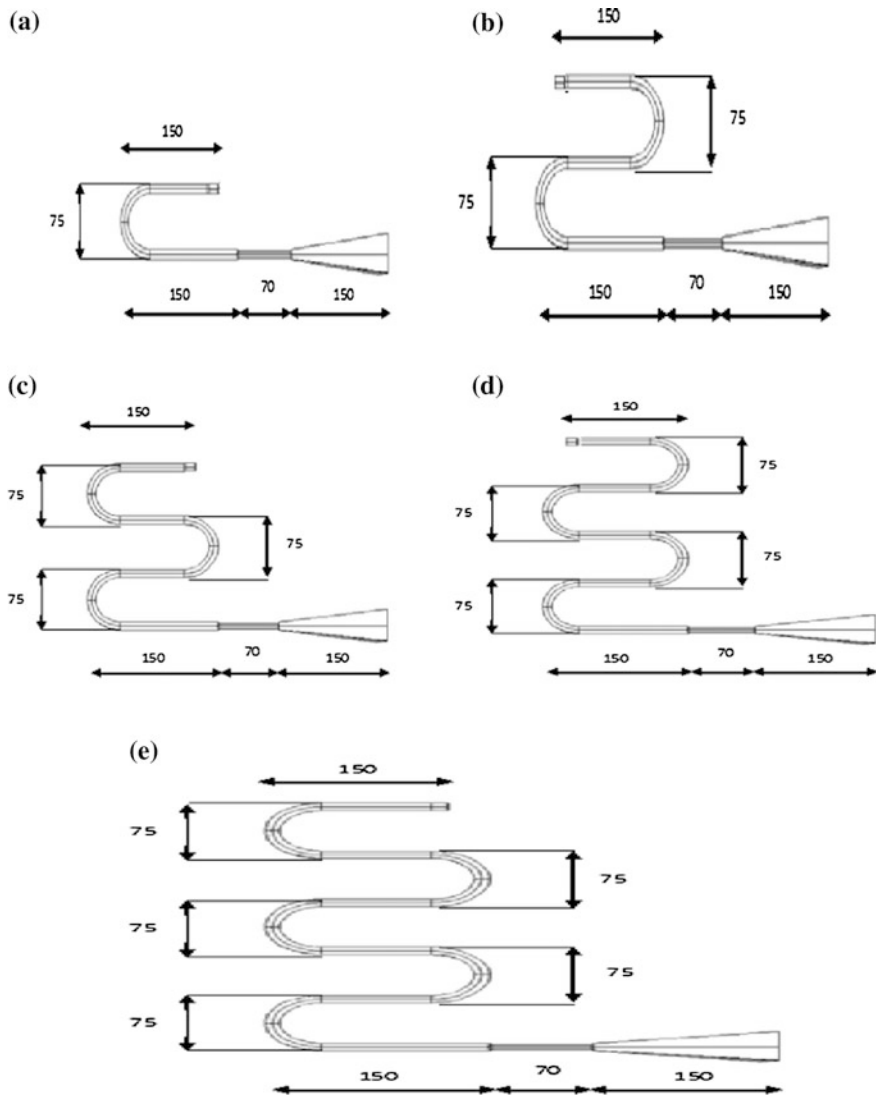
Dimensions of horn attached to a 2 b 4 c 6 d 8, and e 10 bends
